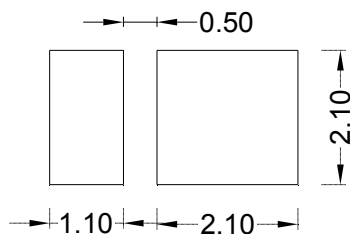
Soldering patterns 推荐焊盘
